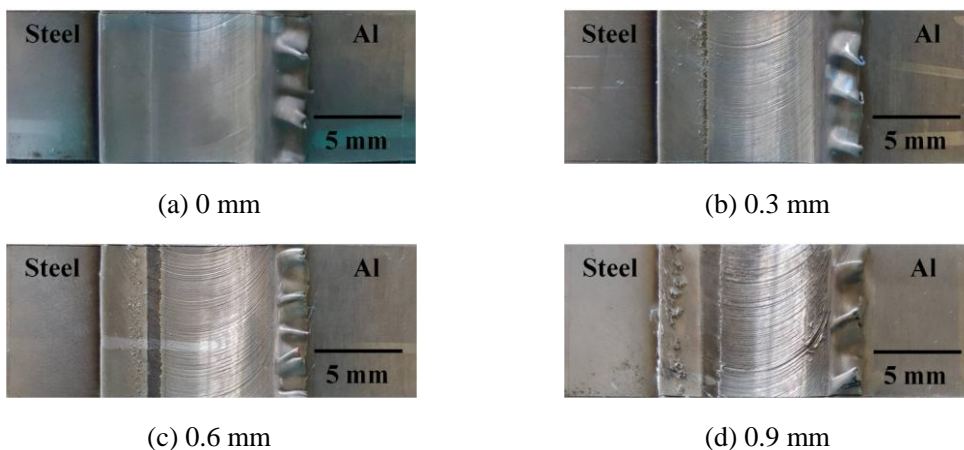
Surface appearance of FS welds under different pin-offsets; (a) 0 mm, (b) 0.3 mm, (c) 0.6 mm and (d) 0.9 mm
